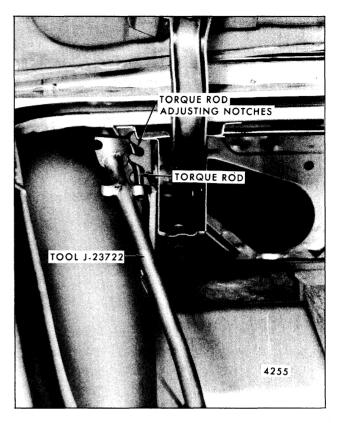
Rear Compartment Torque Rod Adjustment - Cadillac "C and E" Styles
